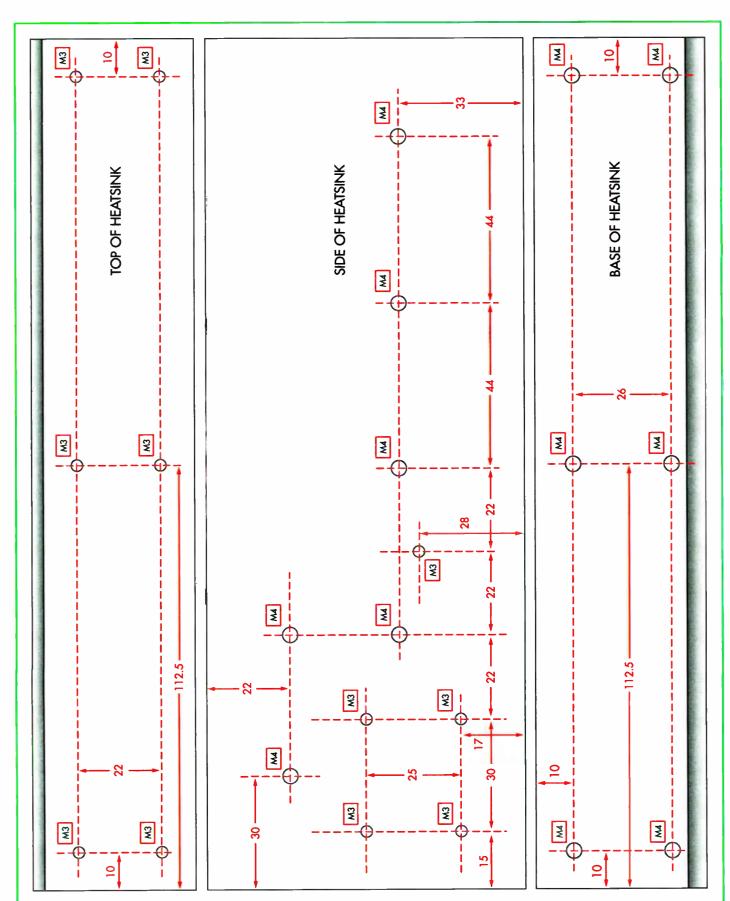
here are the drilling and tapping details for the heatsink. It is completely isolated from the chassis, to avoid using insulation washers for the power devices.
